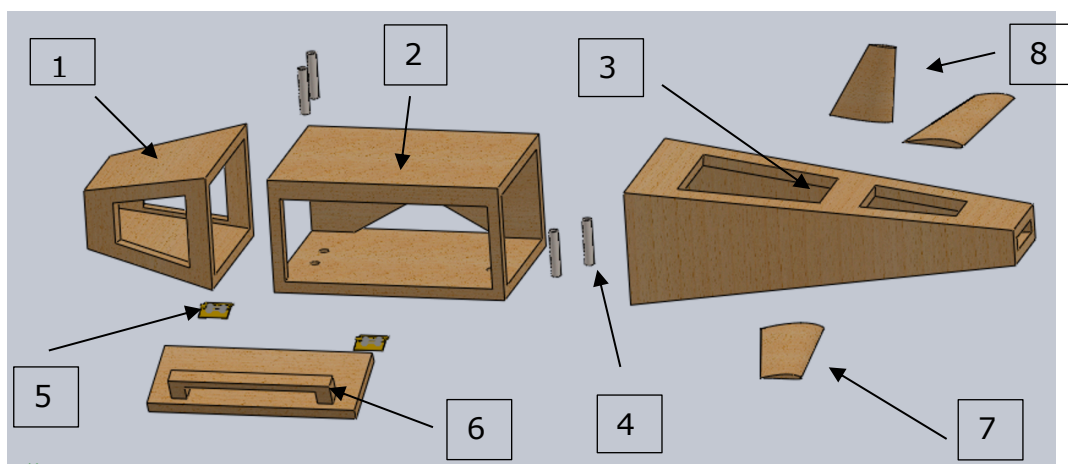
6 Exploded 3D view of fuselage model showing all parts and carbon fiber rods.
